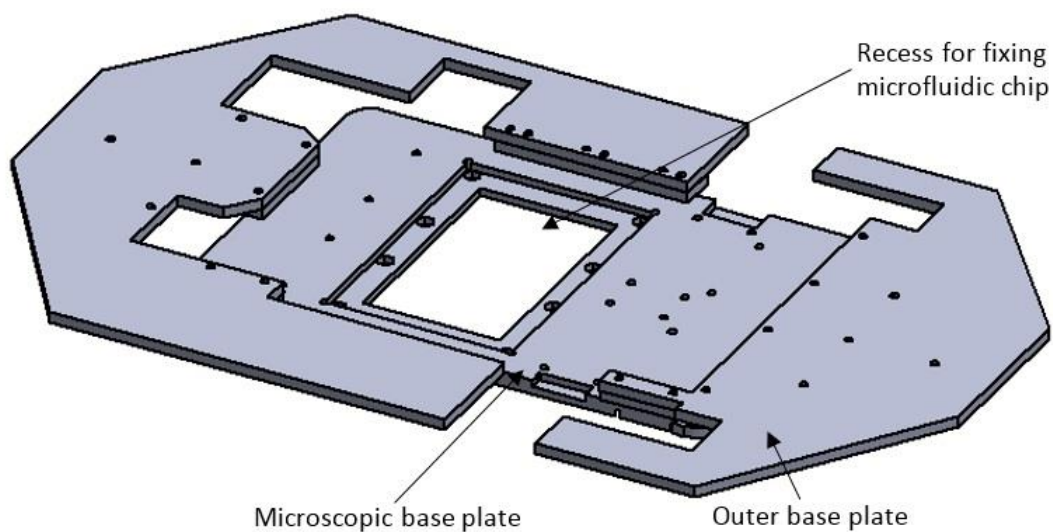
Schematic drawing of the assembly of base plate for the cell culture platform
